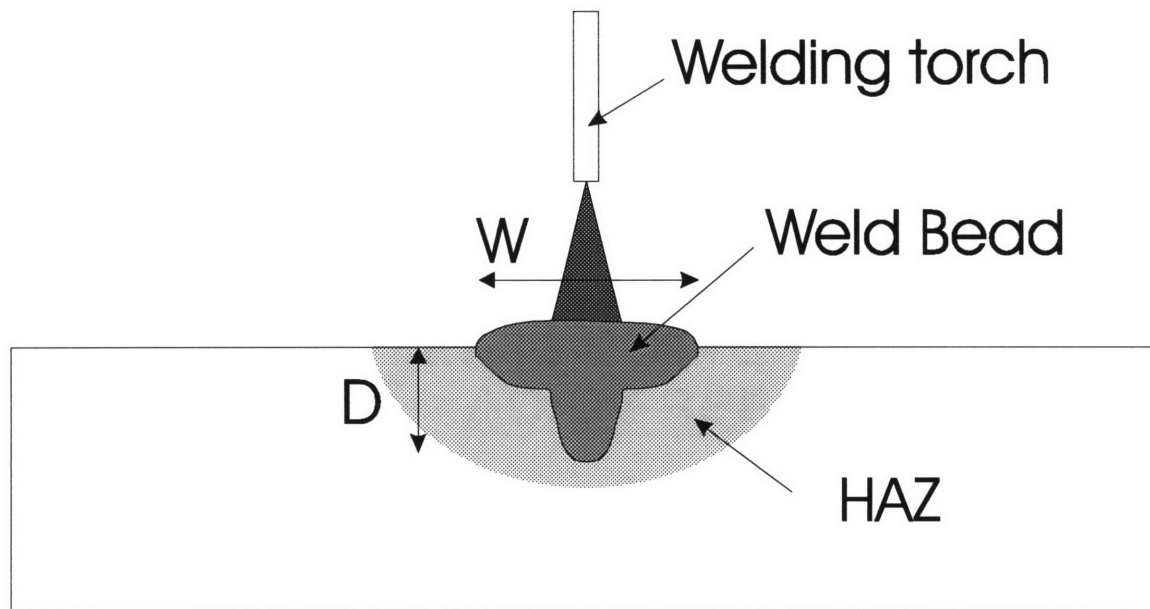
Geometry of the weld in a typical welding process.
